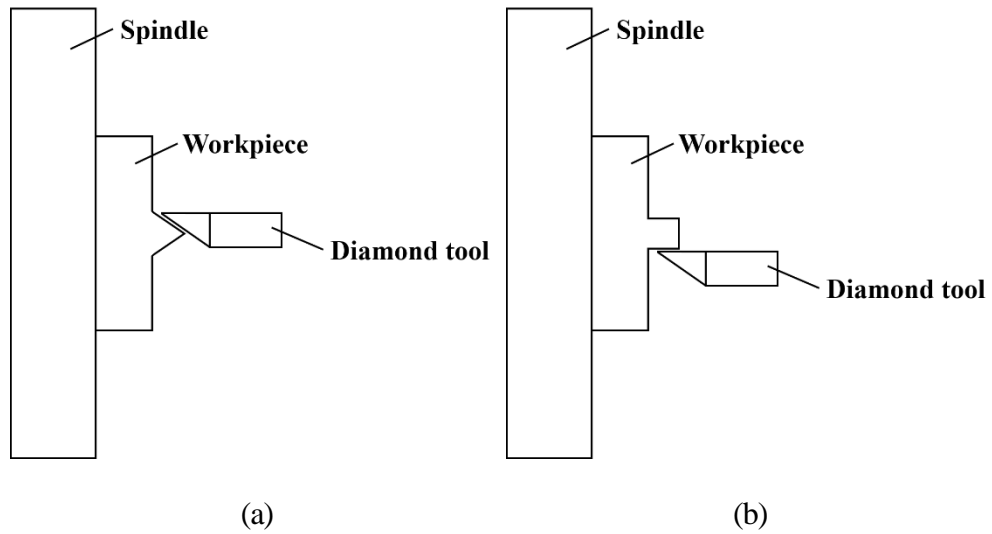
Schematic representation of the diamond tool misalignment in Y direction. (a) Tool is higher than the spindle center, and (b) tool is lower than the spindle center.
